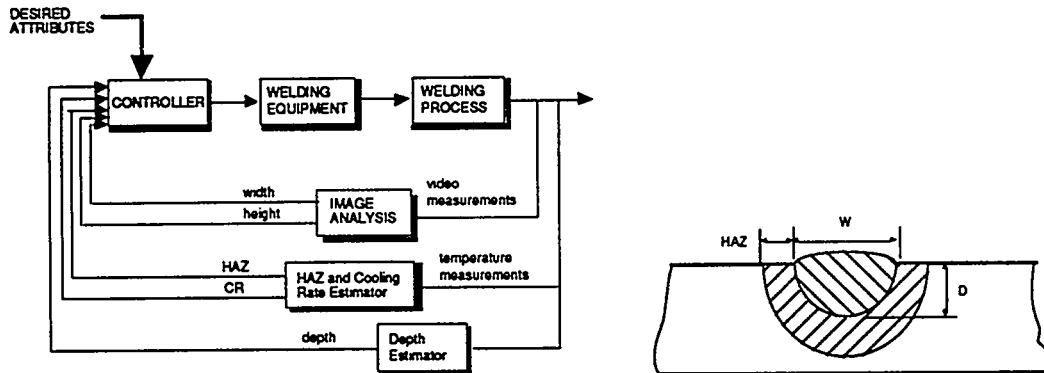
The Welding MIMO Diagram and Associated Weld Cross Section
